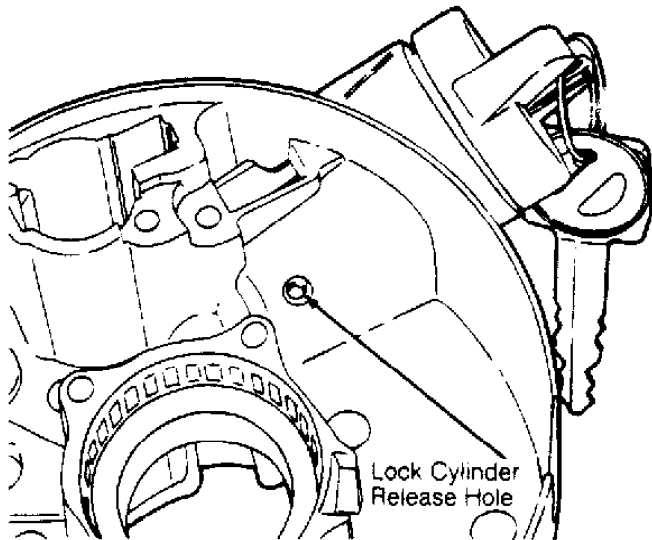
Typical Column Type Ignition Switch Lock Cylinder Removal
